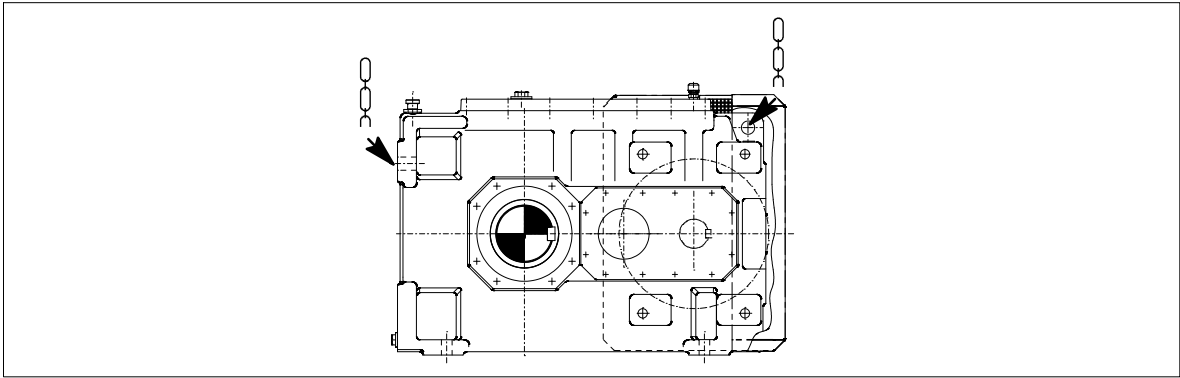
Attachment points on gear units of types H2.. and H3.. up to size 512
